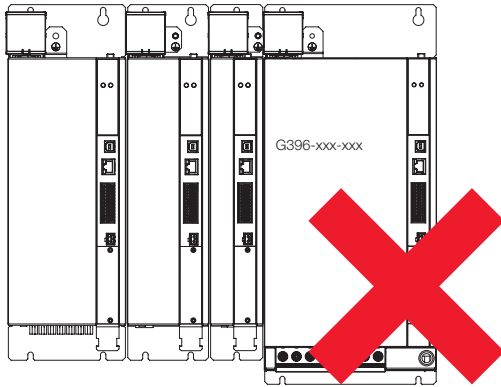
Example of an impermissible arrangement: butt mounting DC-AC Servo Drives of increasing size
